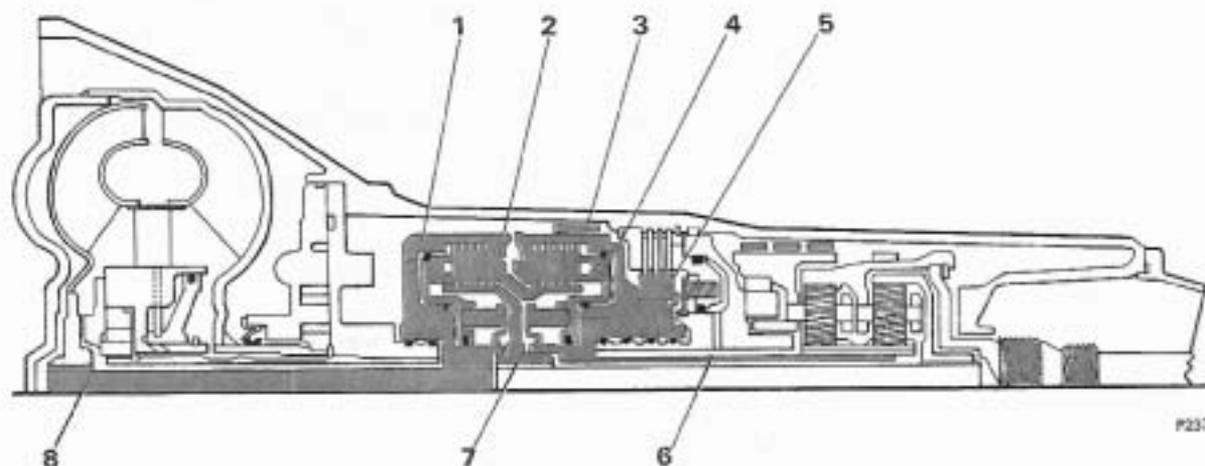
SECTIONED VIEW OF TRANSMISSION SHOWING FORWARD AND DIRECT CLUTCHES
